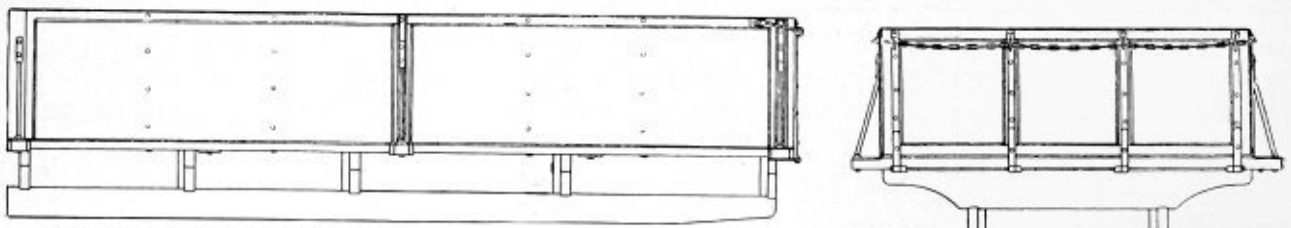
STANDARD FURNITURE BODY ON LONG WHEELBASE CHASSIS, WITHOUT TOP, \$165. TOP EQUIPMENT, \$80 EXTRA
